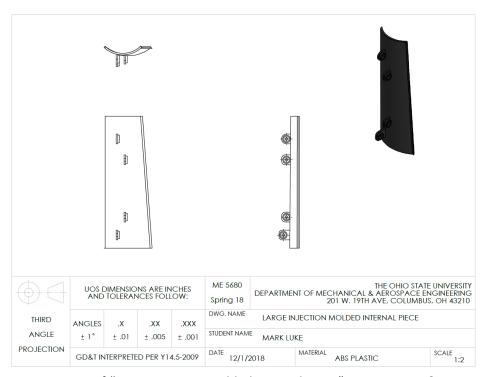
Iso. View of "Large Injection Molded Internal Piece" RL BOM # 11 & SW BOM # 7.
